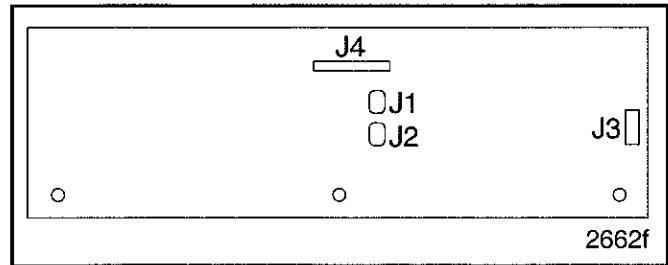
DISPLAY BOARD CONNECTORS
